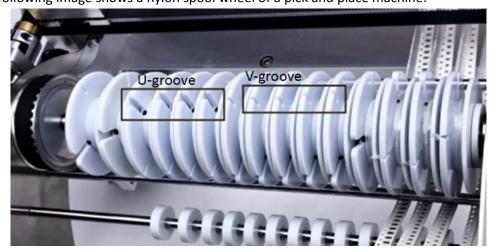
Nylon spool wheel of a pick and place machine
